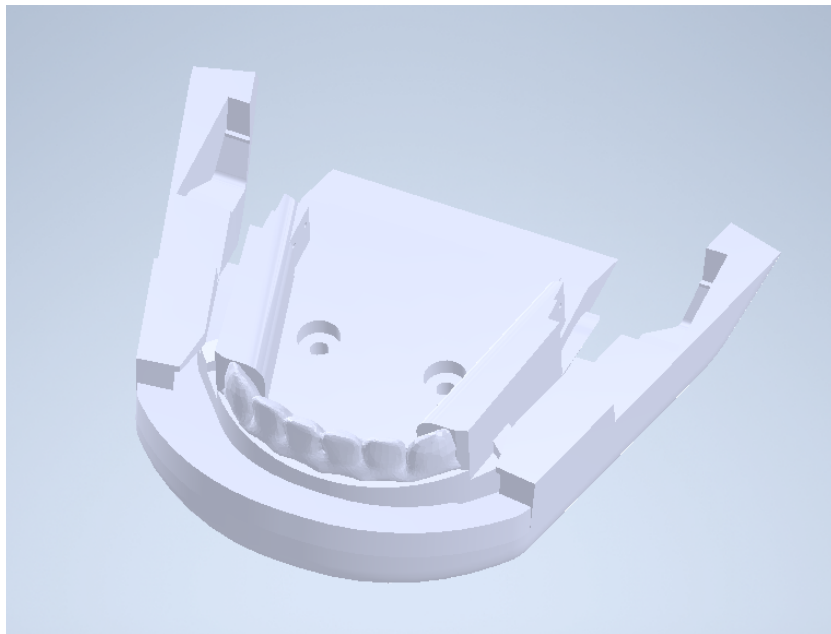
Final CAD Design Jawbone and lower teeth Interaction
